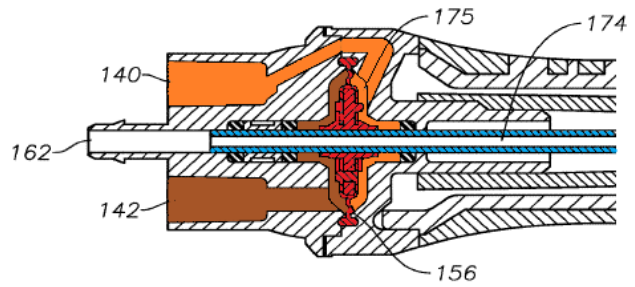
Schematic representation of a dual-actuated diaphragm mechanism. Components: 140 = Pressurized air inlet 1, 142 = Pressurized air inlet 2, 156 = diaphragm, 162 = vacuum connector, 174 = inner cutting tube, 175 = rear air-chamber. Adapted from: [24]
